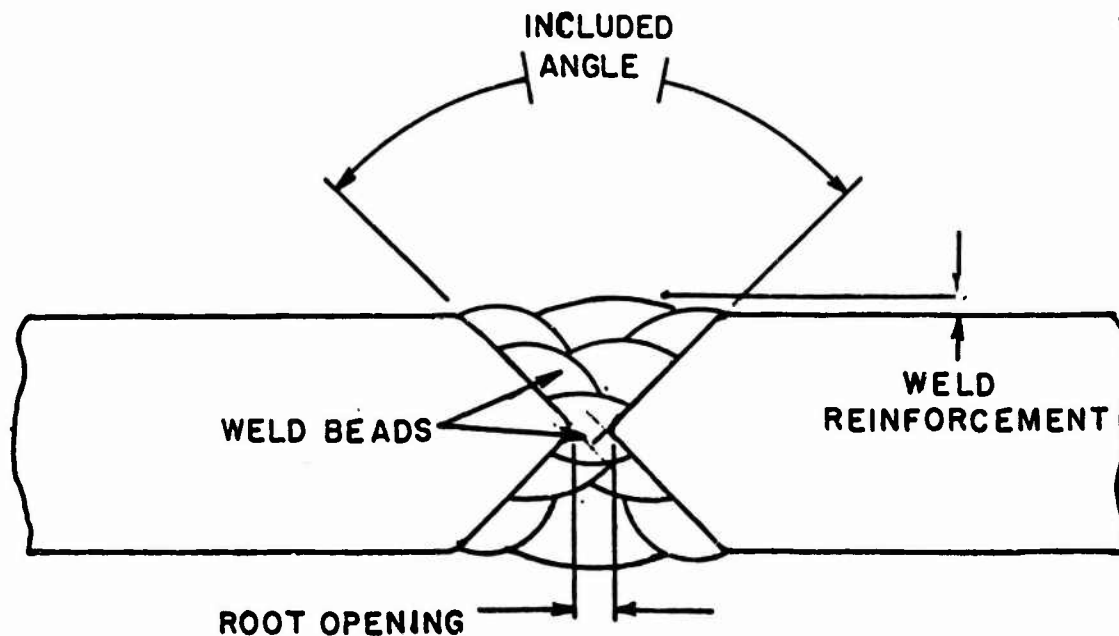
Salient features of a double-V, full penetration, groove weld.
